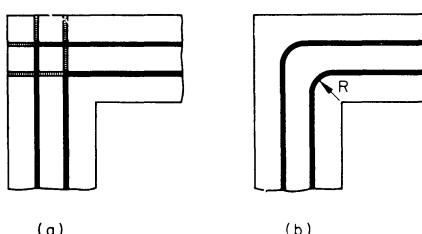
Constructions for the corners of rectangular outline grooves: (a) with fillet; (b) with rounded corners
